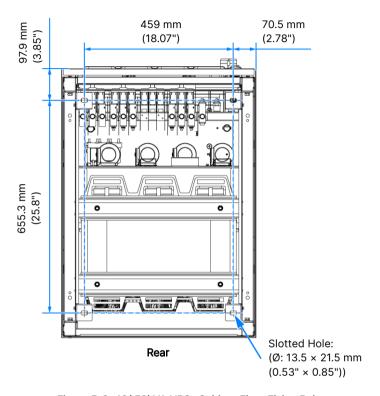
40/ 50kVA UPS\_ Cabinet Floor Fixing Points
